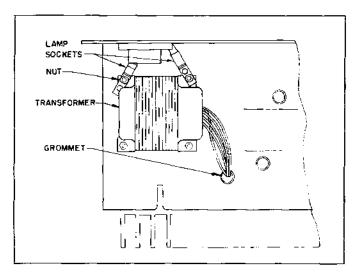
70-VOLT CONVERSION: TRANSFORMER MOUNTING
